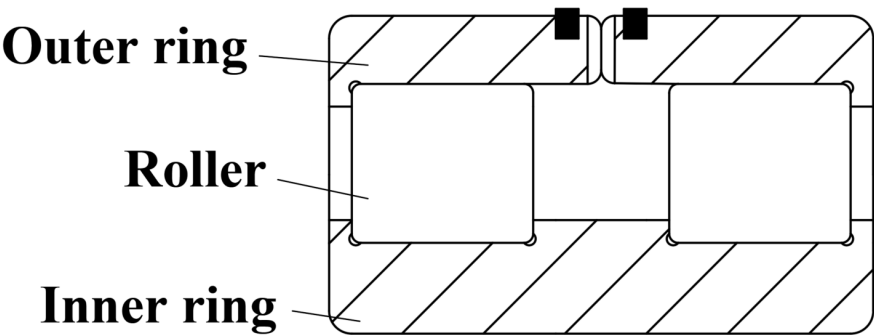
Cageless double-row cylindrical roller bearing used for heavy load CN104653602A.
